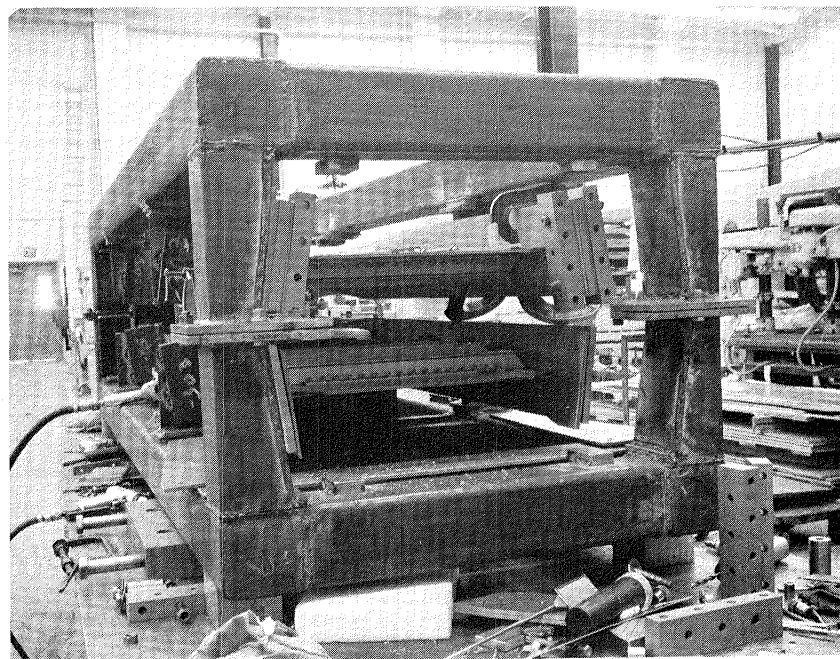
Spar Assembly Fixture Viewed from the Root End
